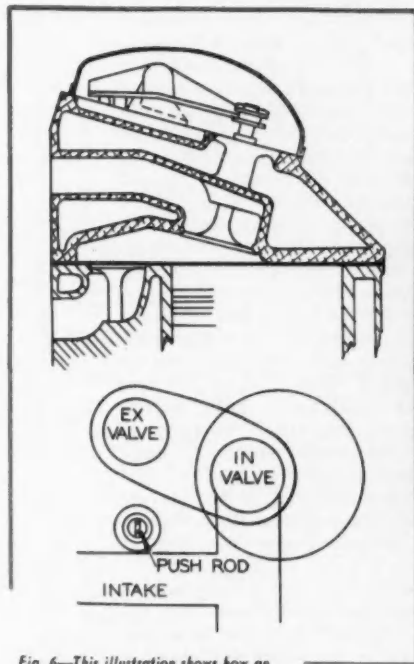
This illustration shows how an L-head engine could be converted to an F-head type. The intake valve spring (not shown) would be located at the lower end of a special push rod arranged to pull as well as push.
